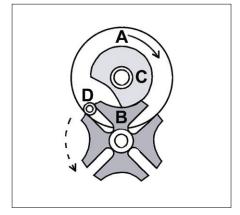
Geneva drive mechanism. A: Drive wheel; B: Driven wheel on transport shaft; C: Locking cam for stationary phase; D: Drive pin.
